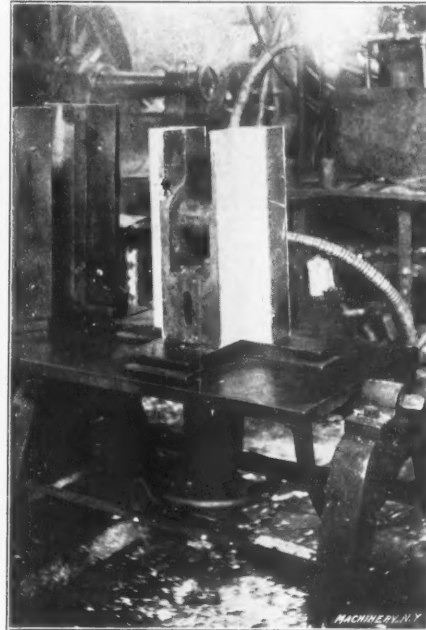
Cross-head Babbitted in the Mold shown in Fig. 38
